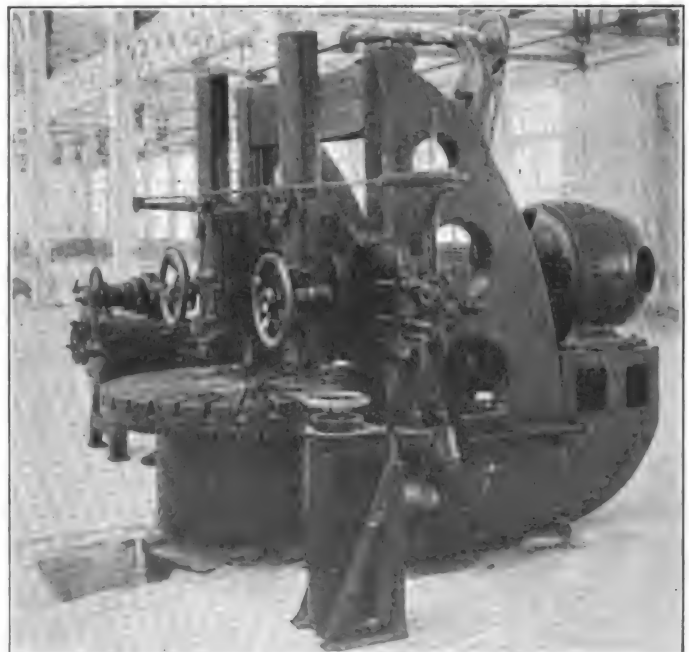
MOTOR-DRIVEN BORING MILL.
